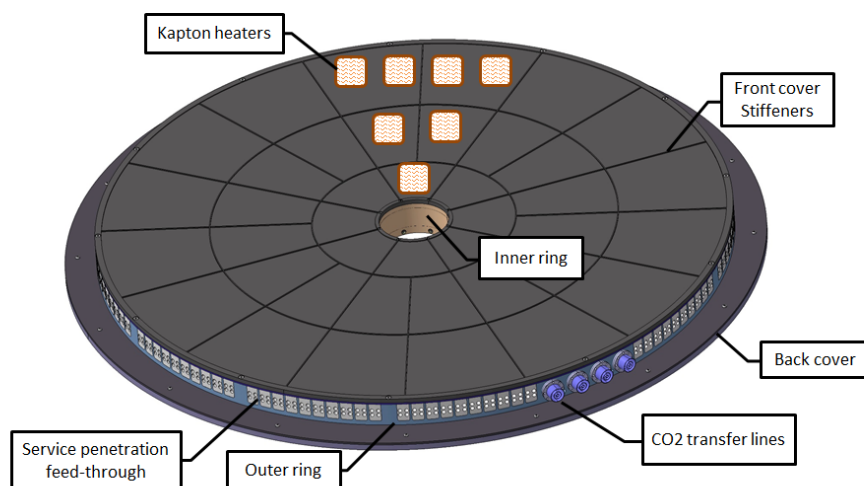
3D view of the hermetic vessel with its main components. In particular, the front cover, equipped with kapton heaters uniformly distributed on the full surface, is visible. Not all heaters are shown in the picture. The heaters do not extend beyond the top of the three-millimetre stiffeners. CHANGE FEEDTROUGH WITH THE NEW LAYOUT AND FRONT COVER SPLITTED IN 2 PIECES
